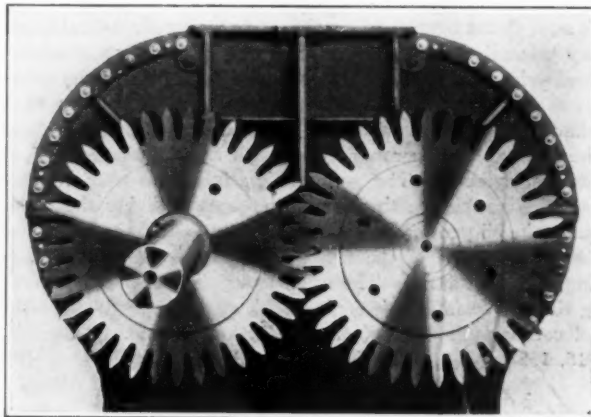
WILKIN FLEXIBLE-TOOTH GEARS AS APPLIED TO A CONNERSVILLE BLOWER
